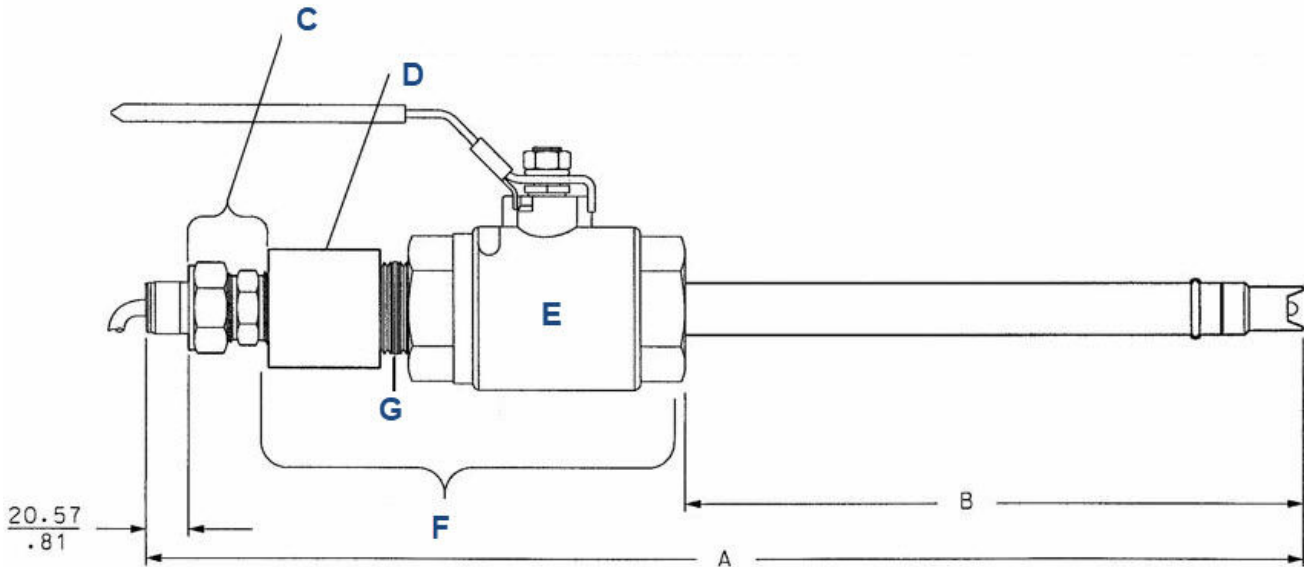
Rosemount 396P/396PVP Dimensional Drawing
